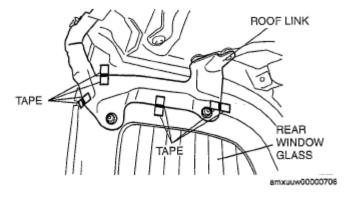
Identifying Masking Tape Courtesy of MAZDA MOTORS CORP.
